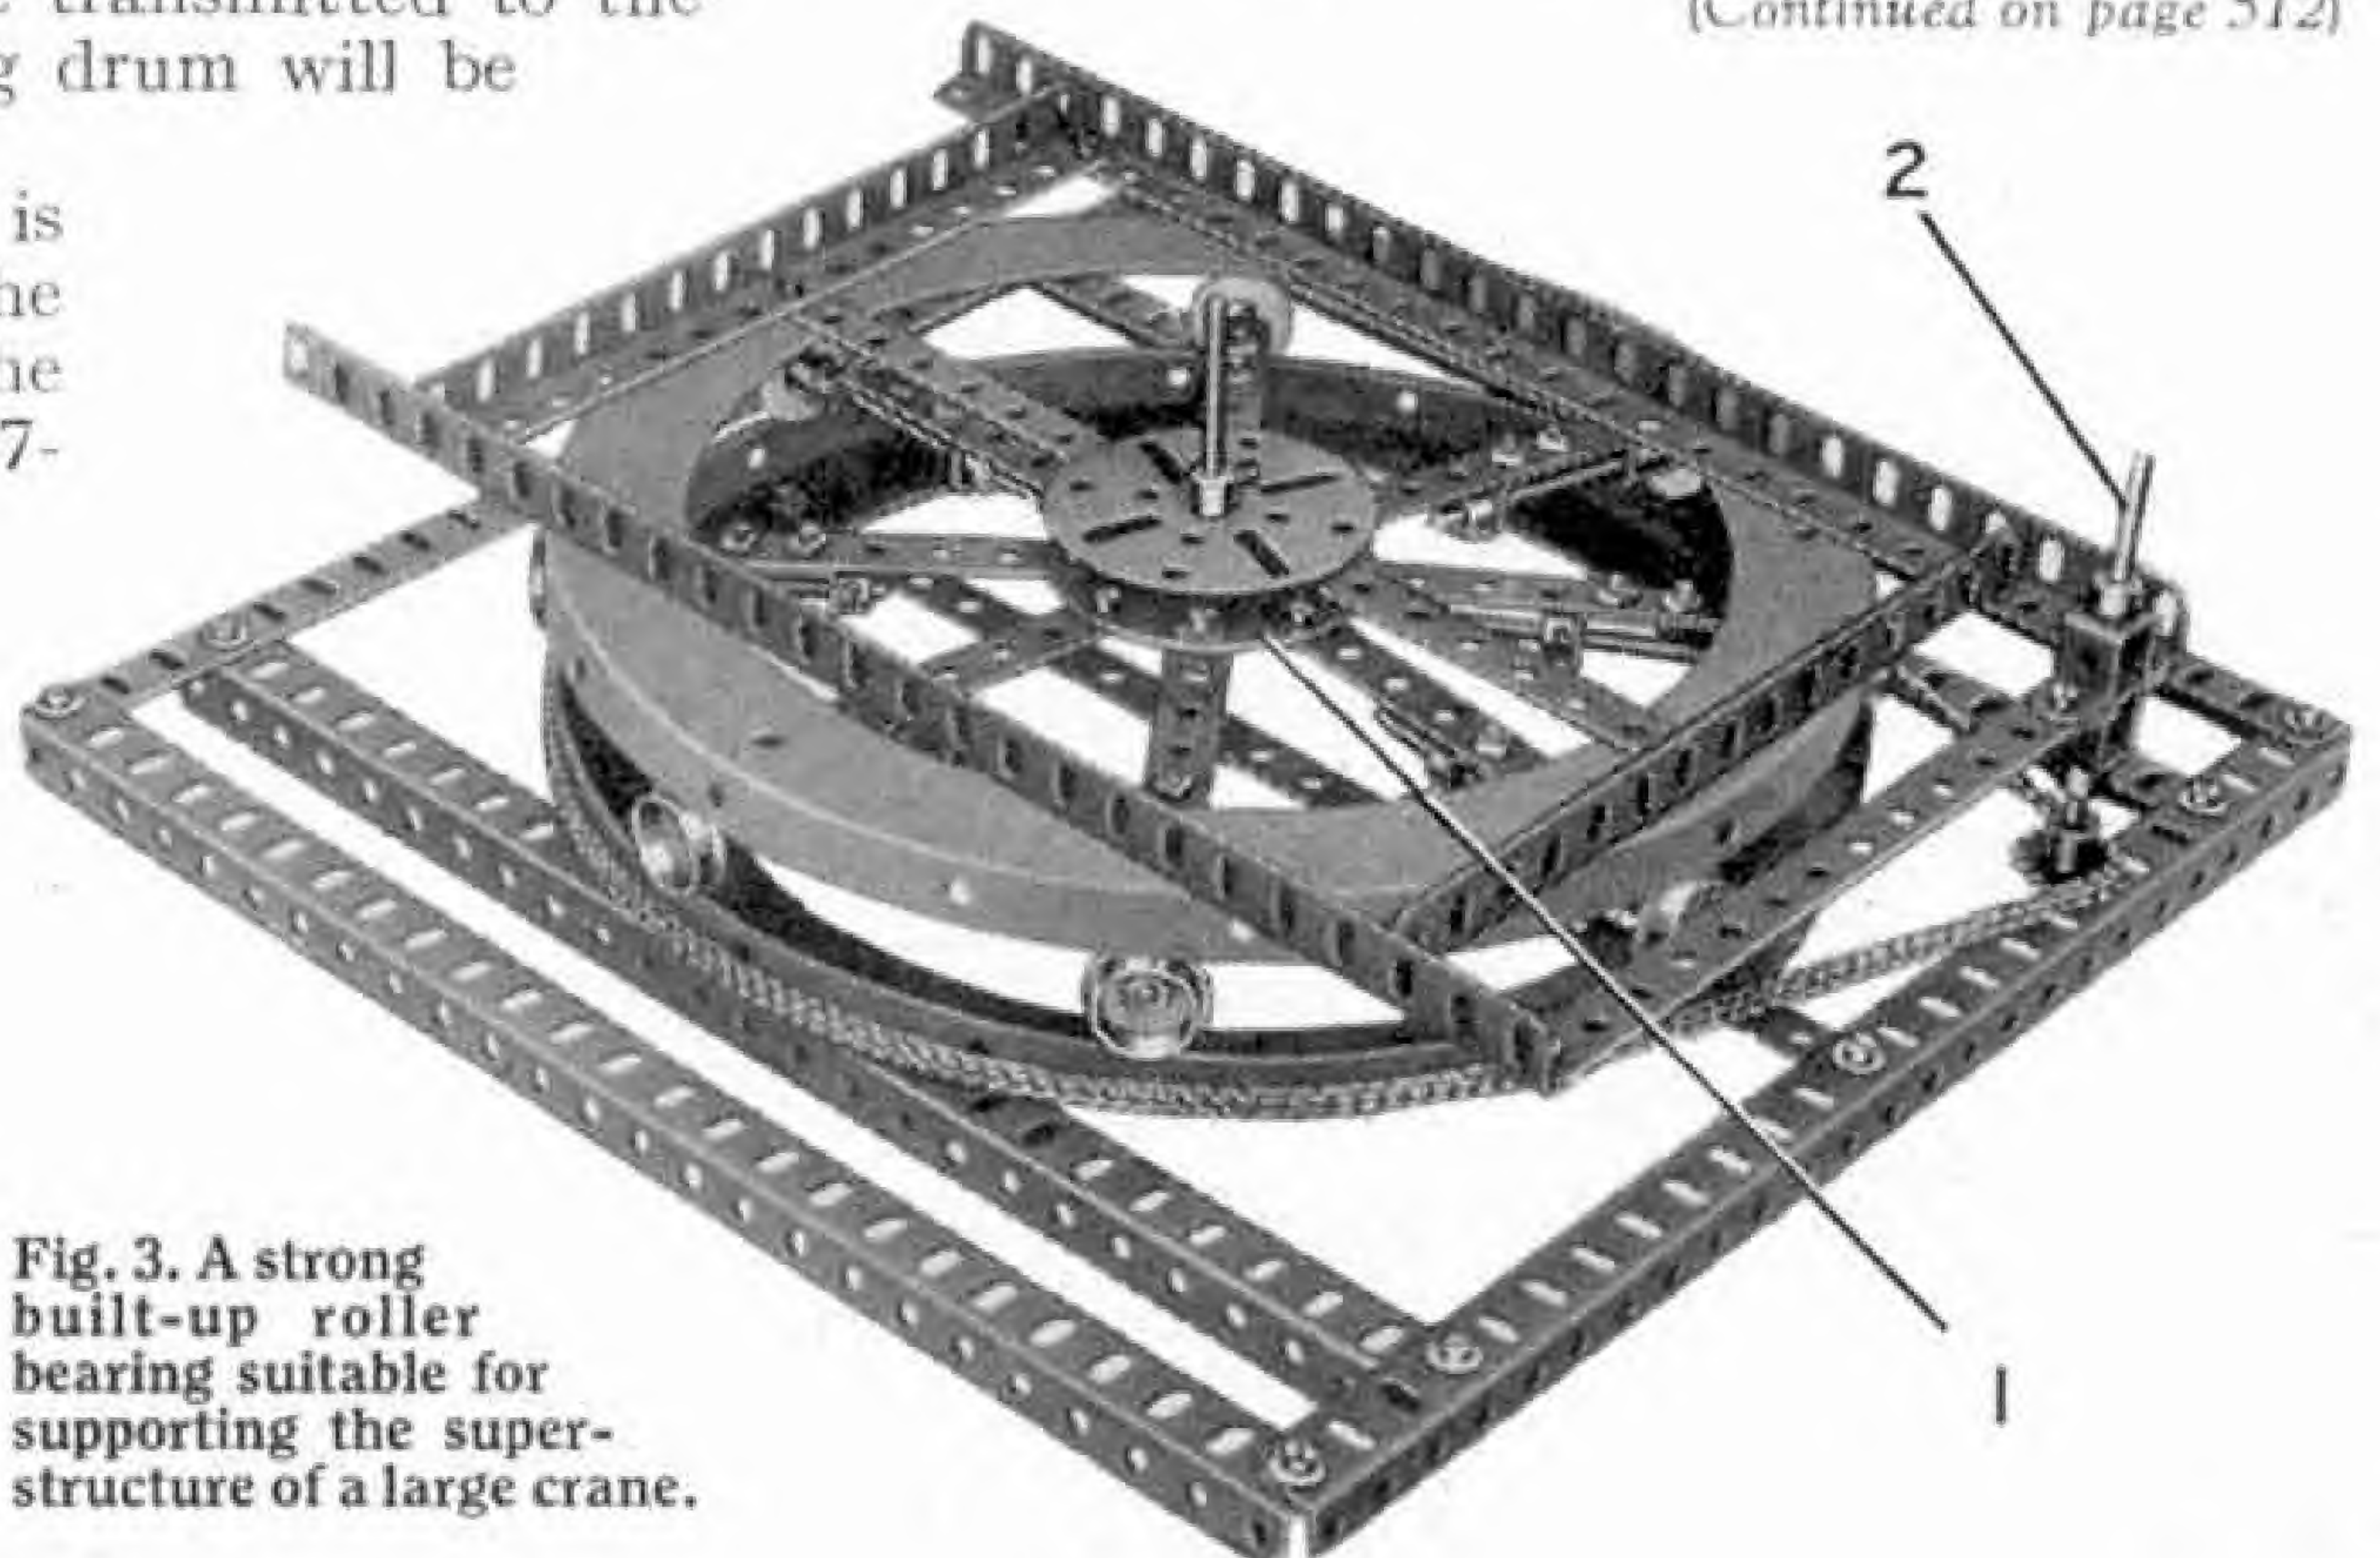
A strong built-up roller bearing suitable for supporting the superstructure of a large crane.
